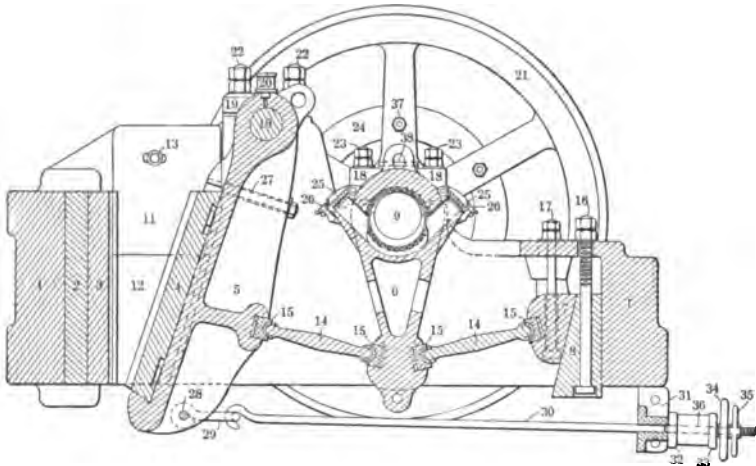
SECTIONAL VIEW OF BLAKE-TYPE BREAKER.
